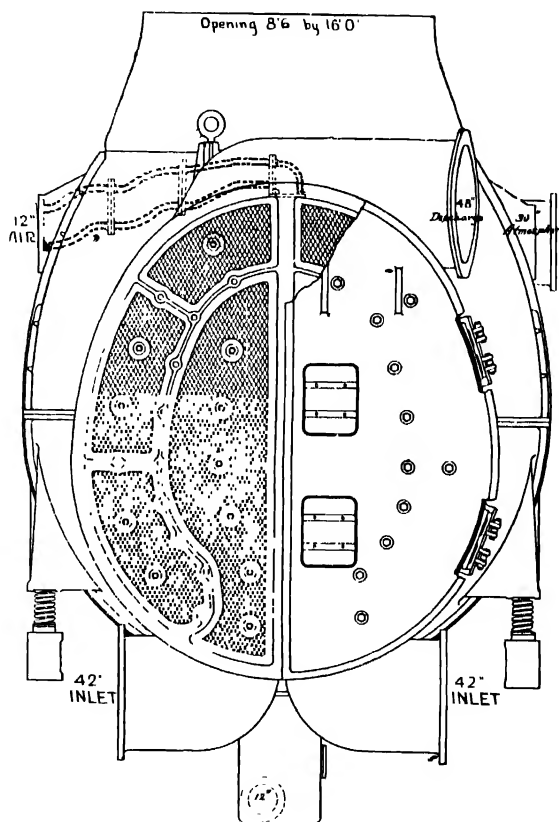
Tube Sheet -- 50,000 sq. ft. Westinghouse Surface Condenser.
